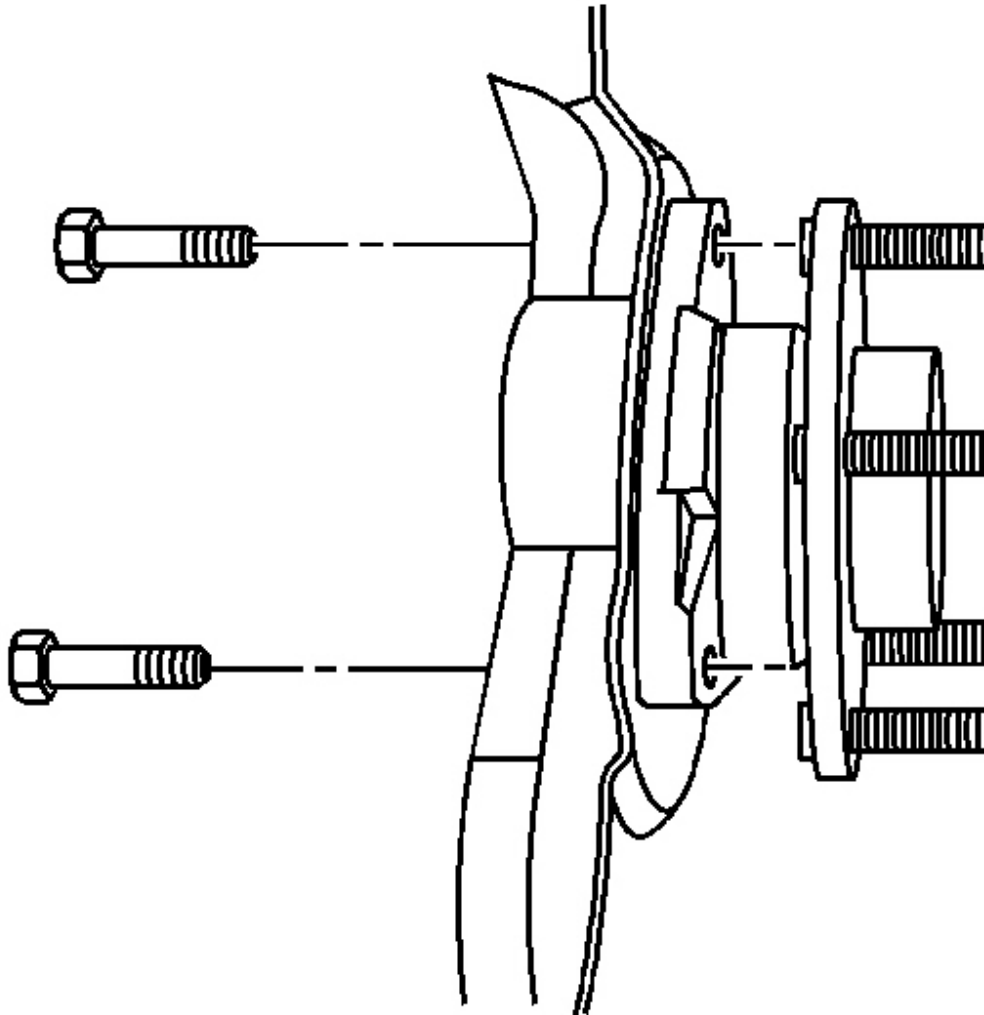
Removing/Installing Wheel Speed Sensor Mounting Bolt
